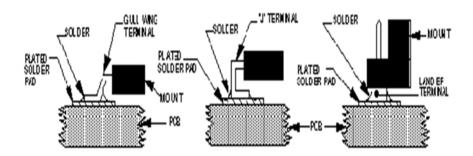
Examples of Gull Wing and J Wing Leads [19]
